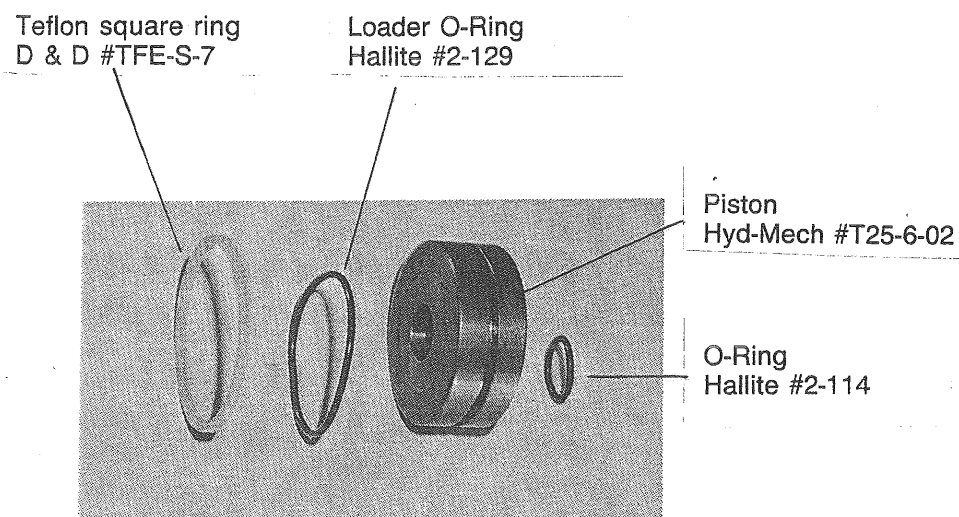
Piston and seals for 2" diameter bore cylinder.
